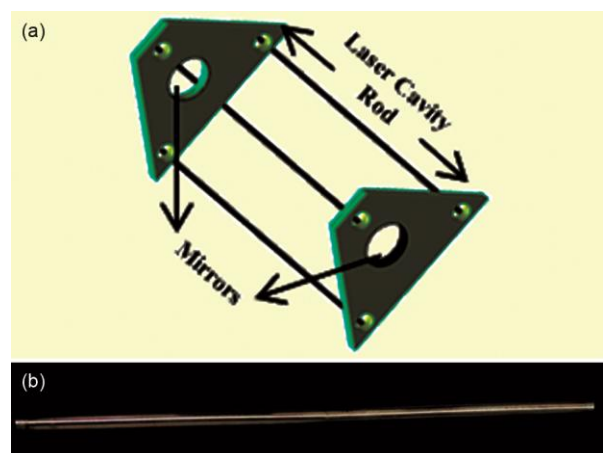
(a) Mechanical structure of laser cavity (LC) (b) Fabricated invar rod.
